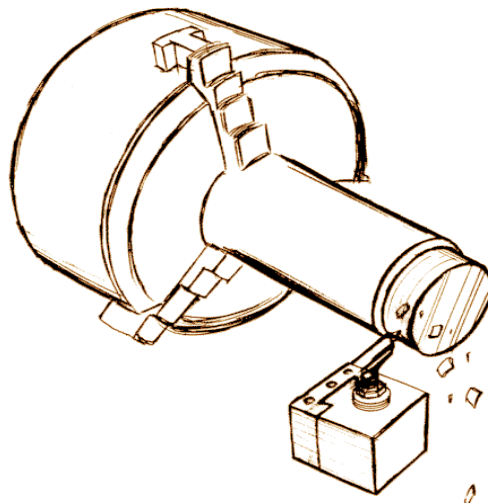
Turning[Reprinted from efunda, Retrieved from http://www.efunda.com/processes/machining/images/drill/drill_helical_chip_1.gif]
